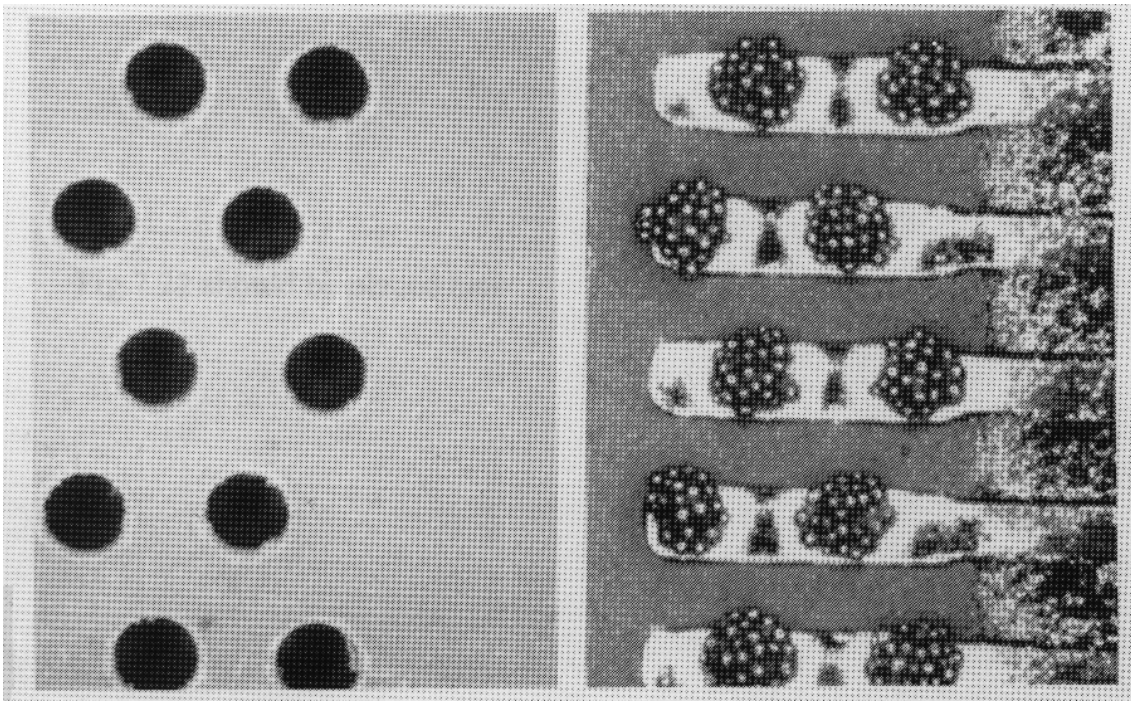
Printing through 0.3 mm diameter holes with Mylar stencil. To obtain the correct amount of solder paste two or three small holes may be used for each solder land.
